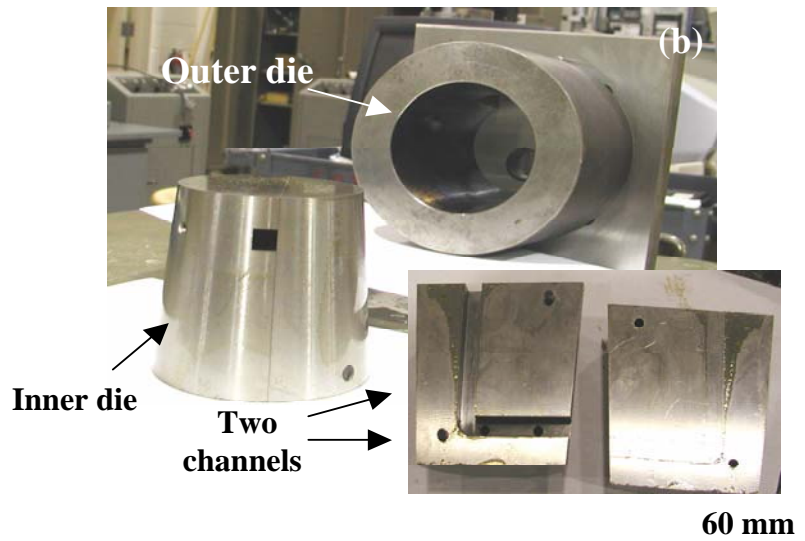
Assembly of the symmetric ECAP die, including the main body with the guiding and filling plates mounted to form the first and second channel of the die, and the holder for the two billets. The billet size can vary from  $9.5 \times 9.5$  to  $25 \times 25$  mm, with the length of 102 mm.
